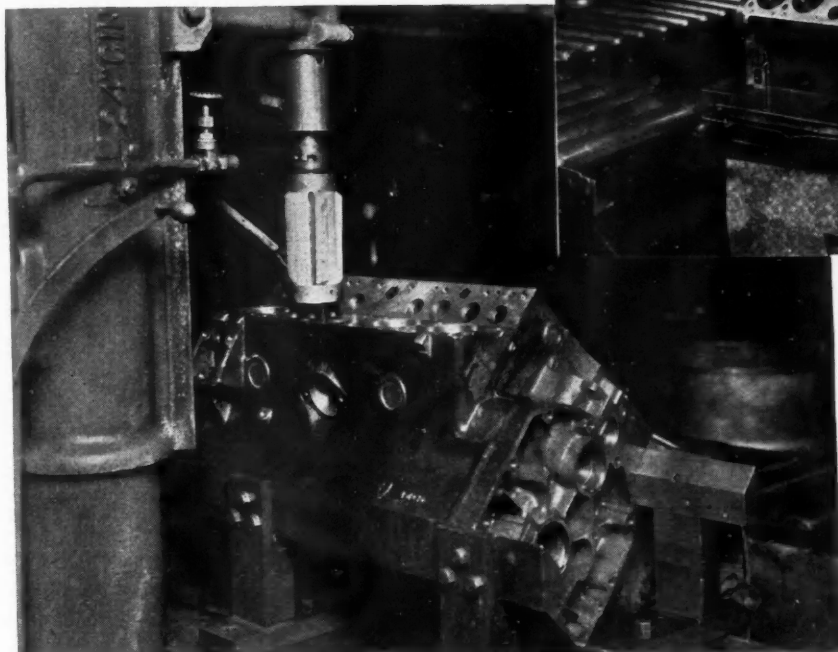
(below)—Repair and finish honing operation on single spindle Cincinnati. Tolerances on this operation 0.0005 in. for out-of-round and 0.0005 for taper
